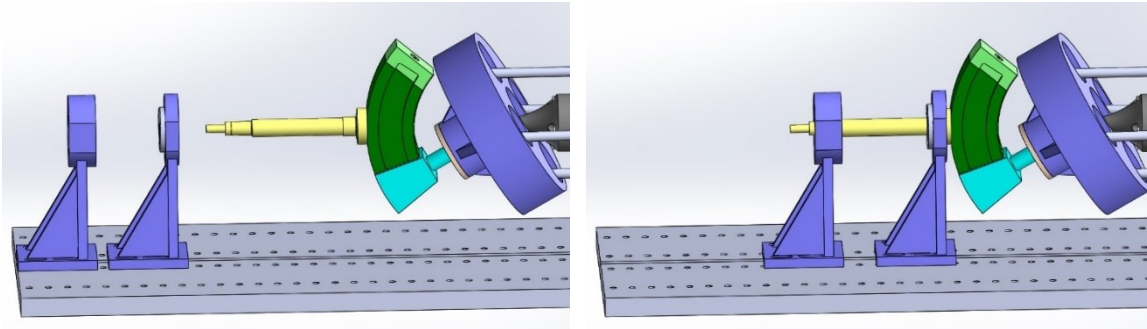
Jaw shaft subassembly, disc subassembly, jaw shaft bearings and steel plate assembly.
